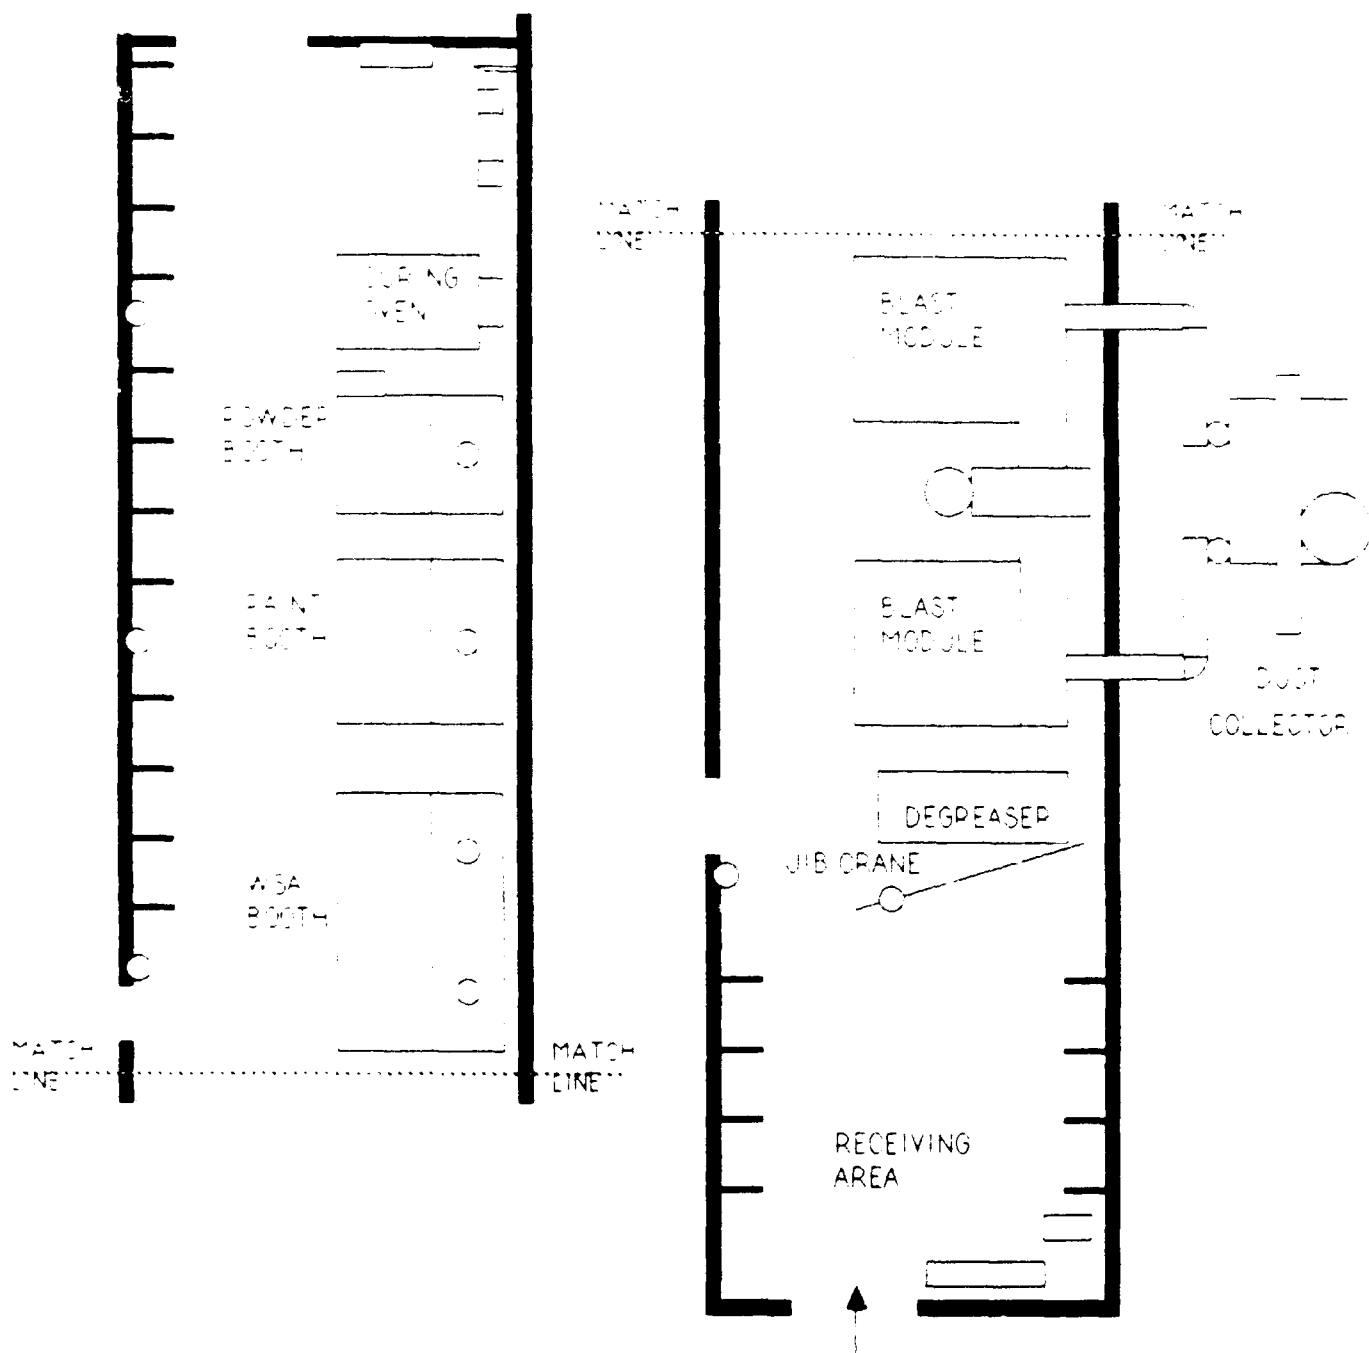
SIMA(SF) CC Shop Layout (Current)
